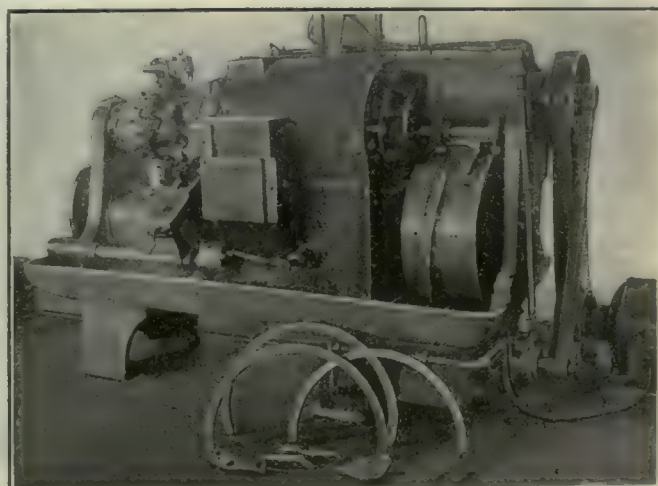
REAR VIEW OF BAIRD CHUCKING MACHINE
